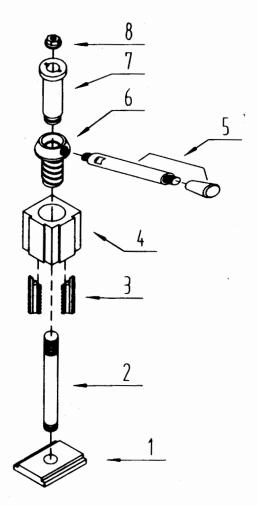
Replacement Parts illustration for Wedge Type Tool Post
